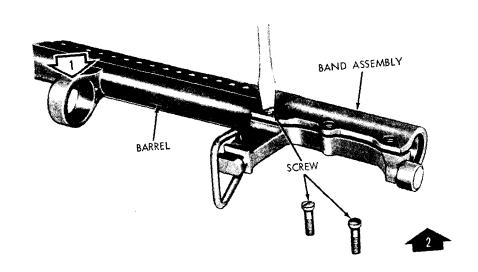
Removal/installation of barrel and bayonet band assembly.
